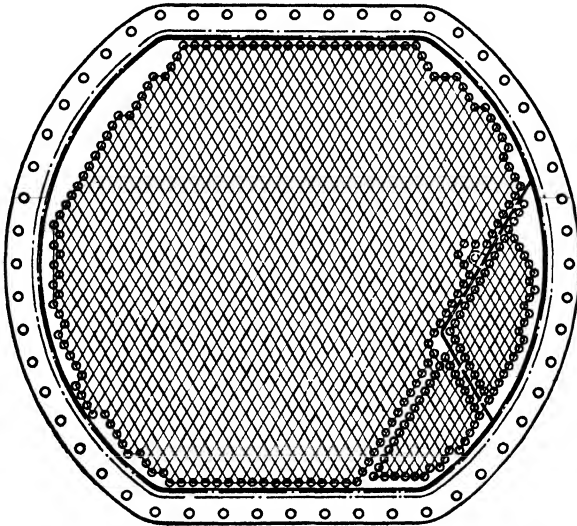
Tube sheet of condenser shown in Fig. 109.
